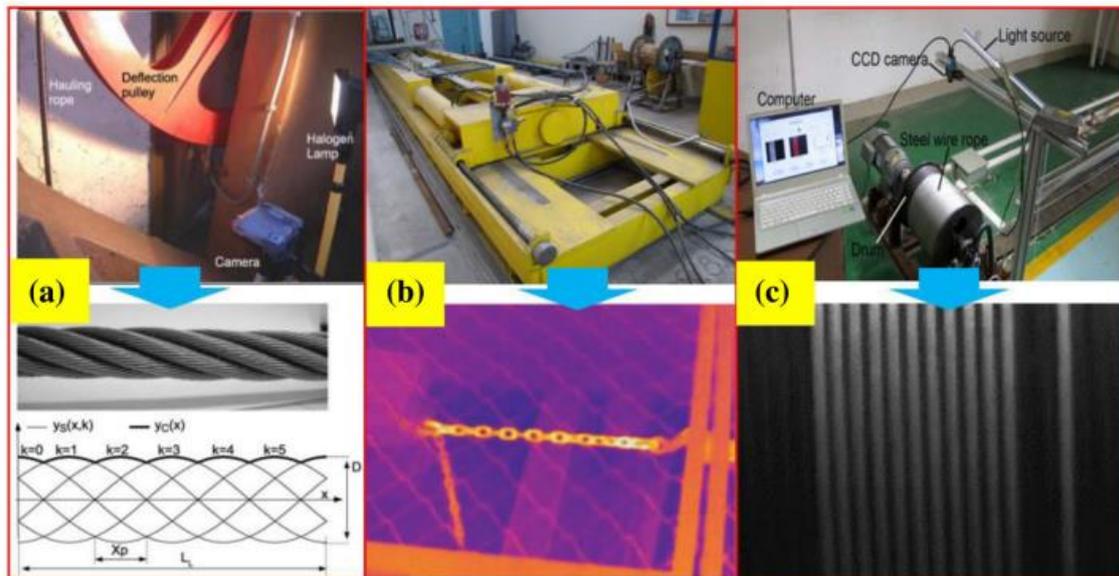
Other testing methods: a) Laser light method b) Thermal Imaging c) Machine vision
